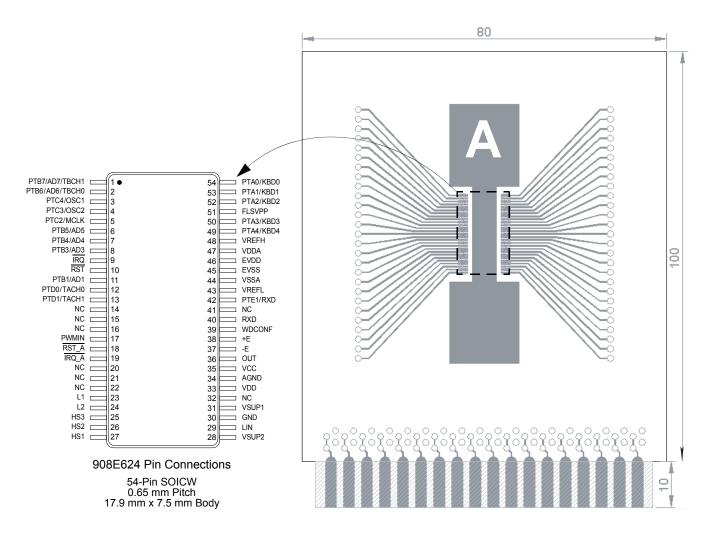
Surface Mount for SOIC Wide Body Non-exposed Pad
